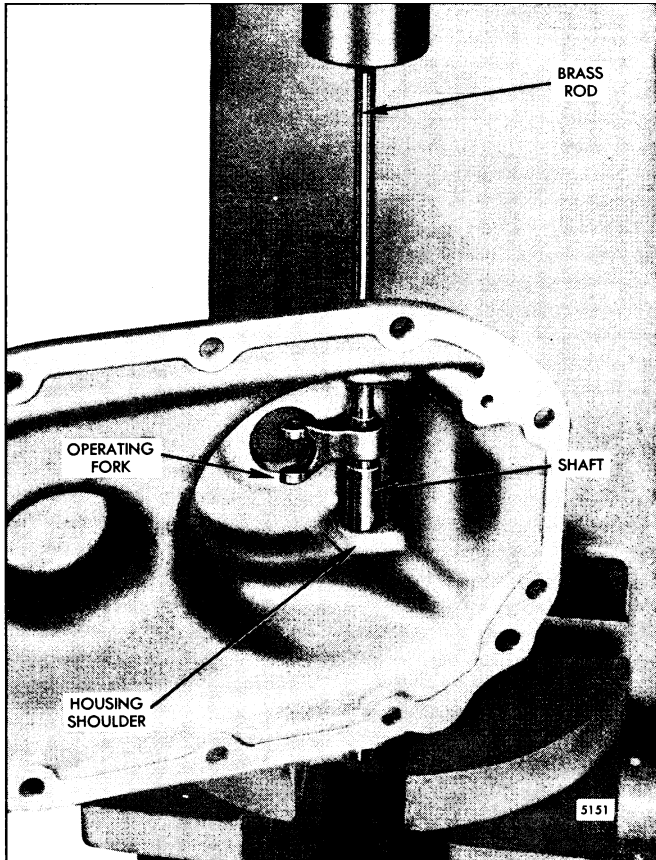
Removing Operating Shaft and Fork From Weight Housing
